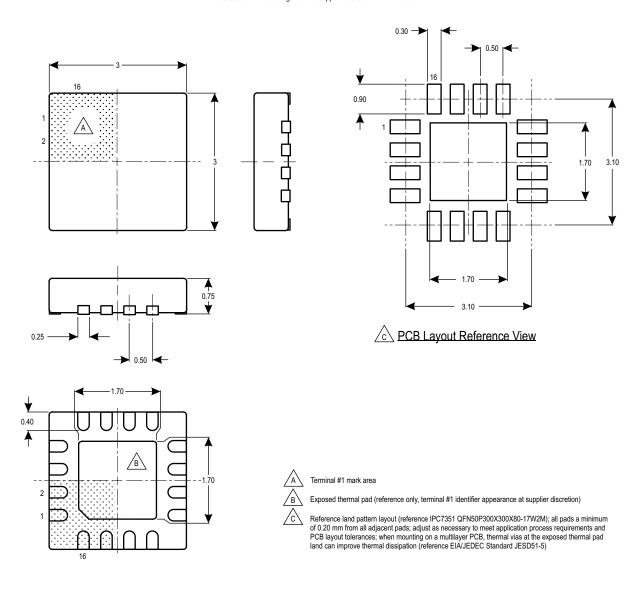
16-contact 3 mm × 3 mm QFN package (Suffix ES)
